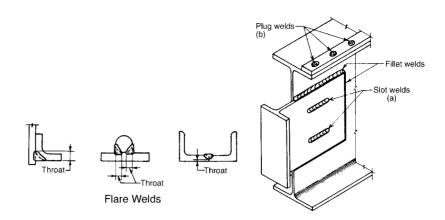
Examples of flare welds and other welds in operation
